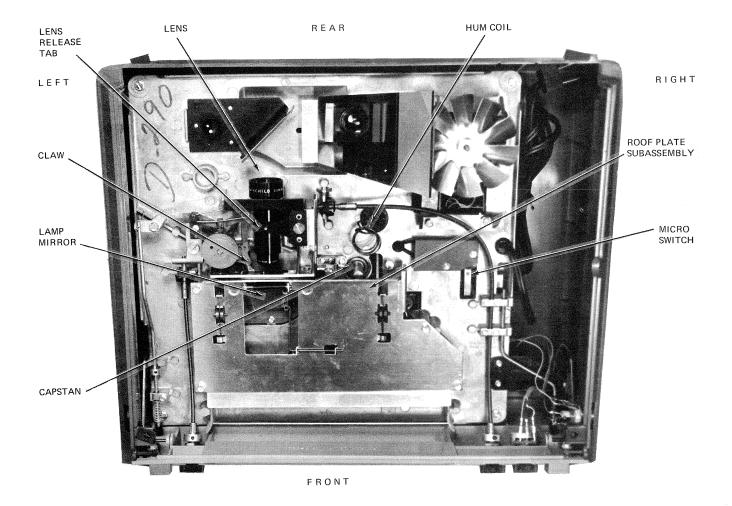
Seventy-21, Storage Tray and Lid Assembly Removed
